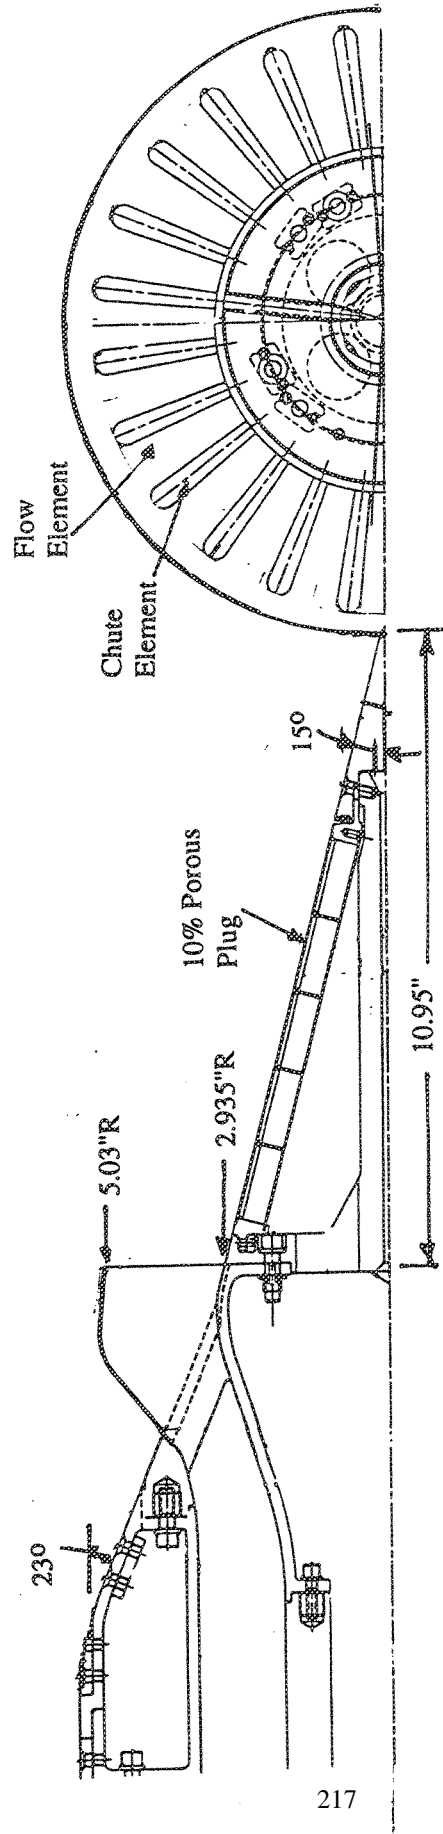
Side view of a 24 CD-chute axisymmetric suppressor with porous plug used for axisymmetric mixer ejector nozzle (AMEN) configurations (Ref, 28) SAR=3.7.
